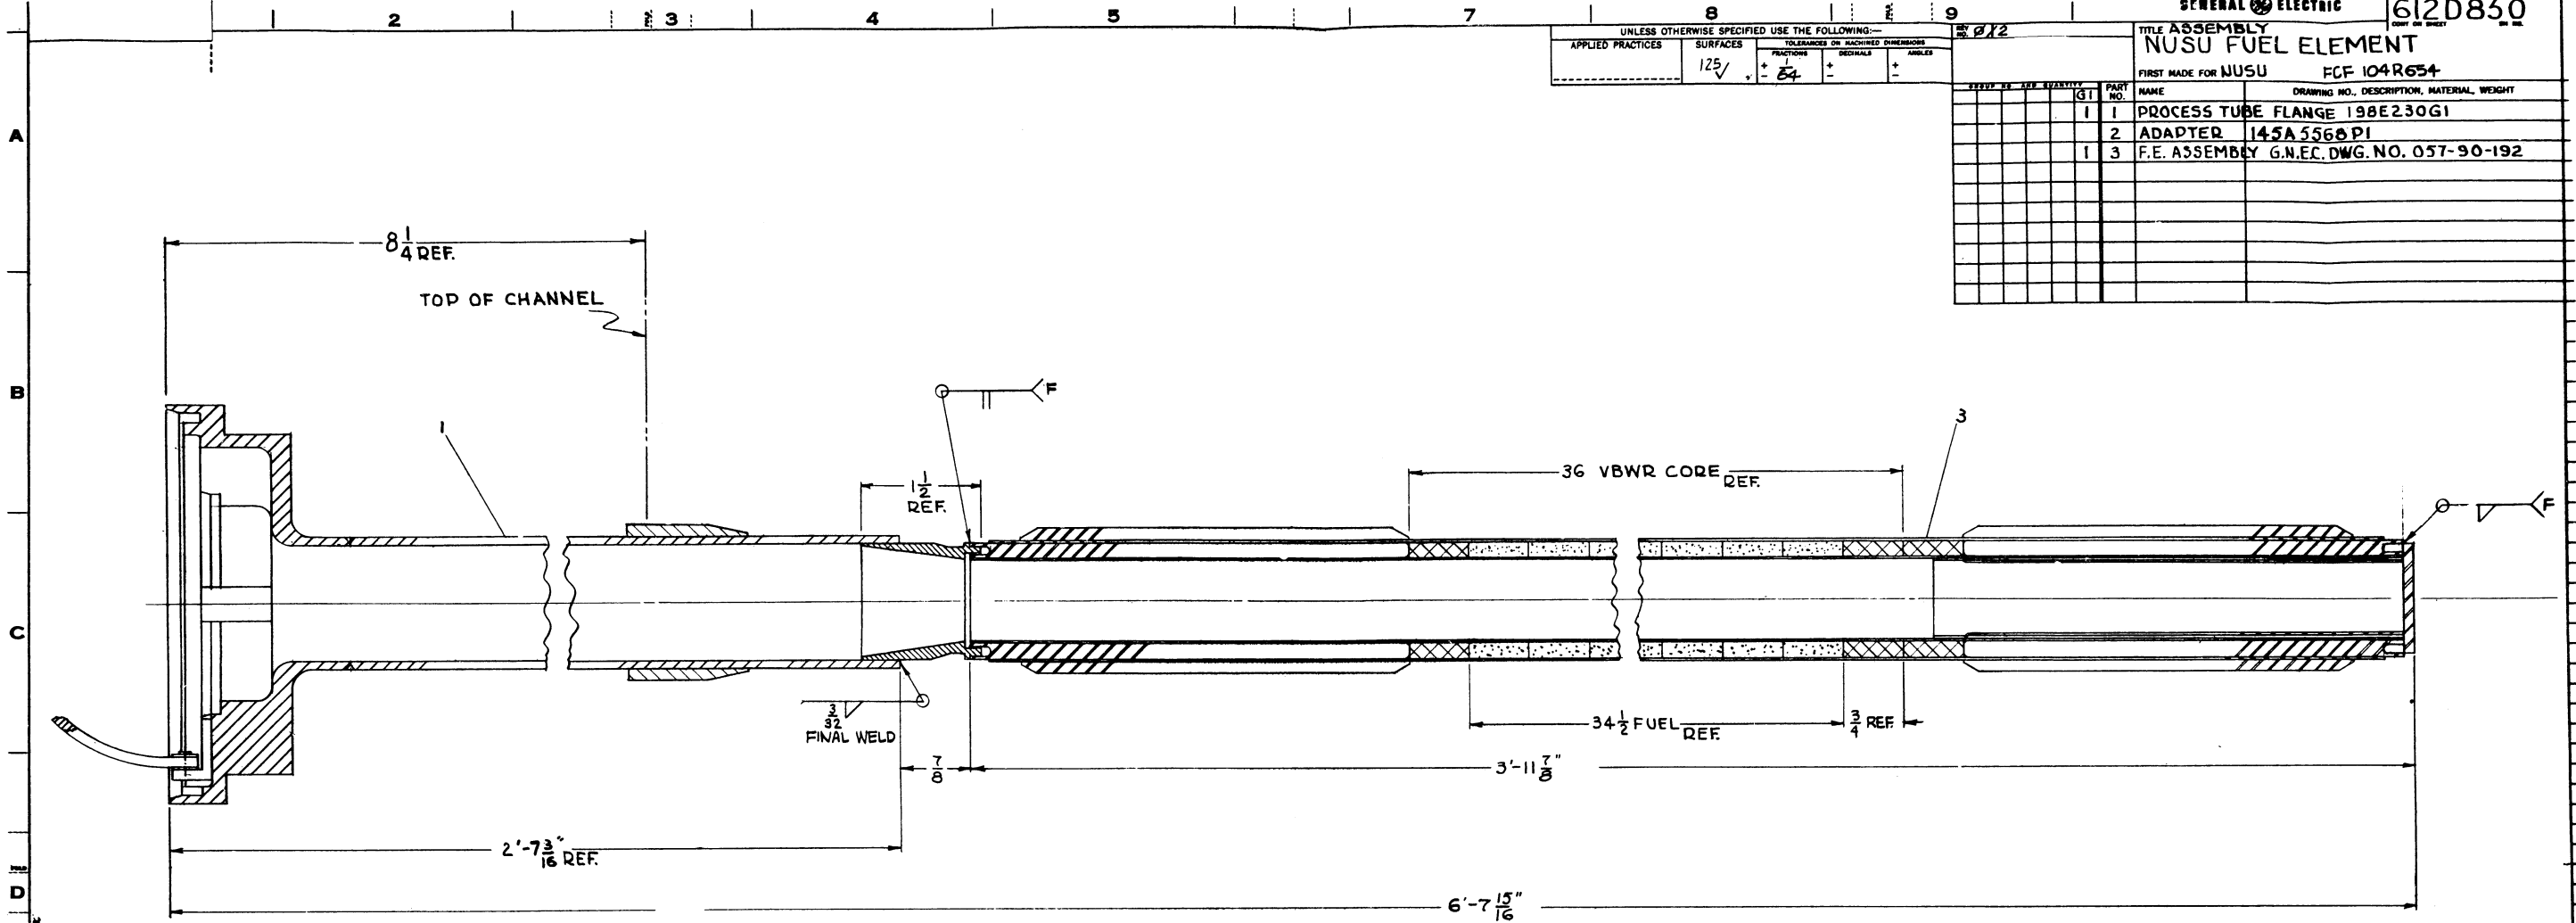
through 9.7 are design drawings of the NUSU fuel element based on drawings and information furnished by the General Nuclear Engineering Division of Combustion Engineering Corporation.
